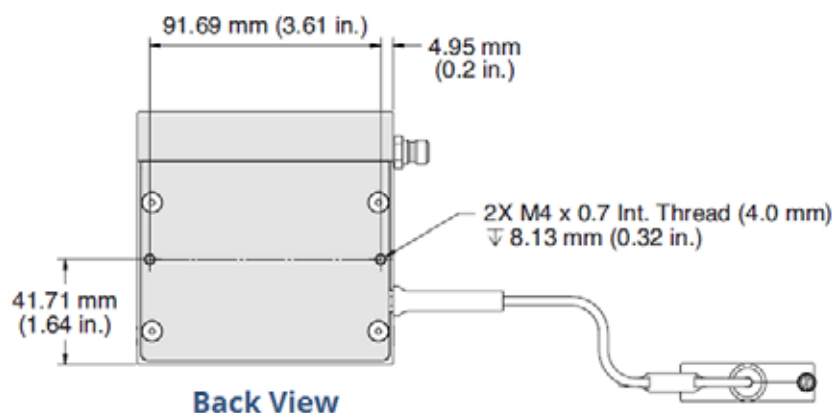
Dimensions – Mounting Features (View on Back of Sensor)
